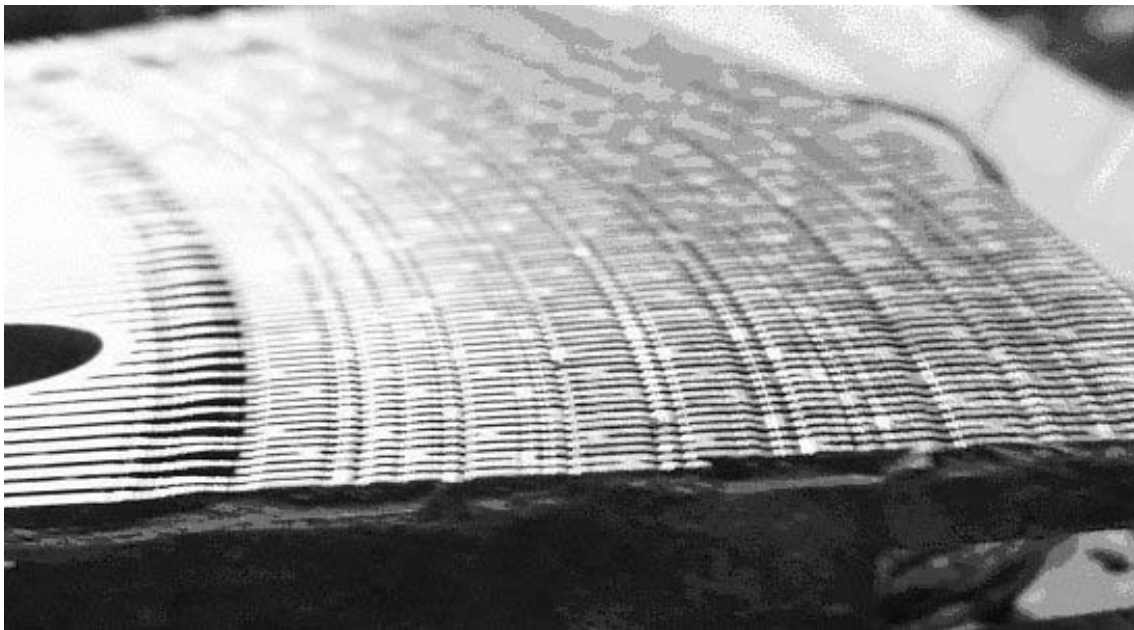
The replaced plate containing the fibre-optic sensors is shown. The serration wear pattern is clearly visible after approximately 1700 working hours.
